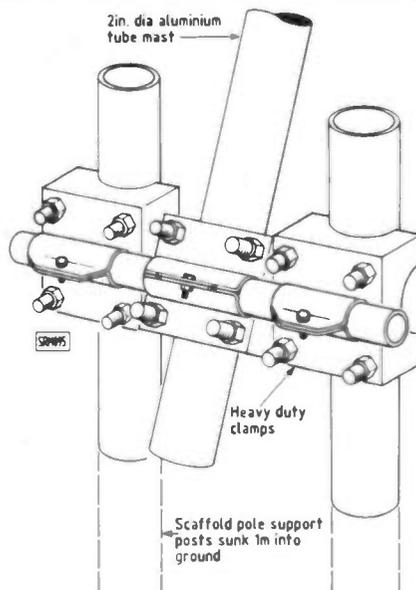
A simple pivot assembly using heavy-duty clamps.
